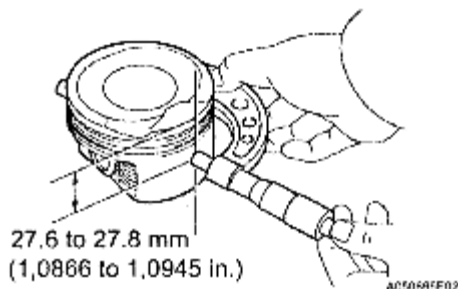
Measuring Piston Diameter Right Angle To Piston Pin Center Line
